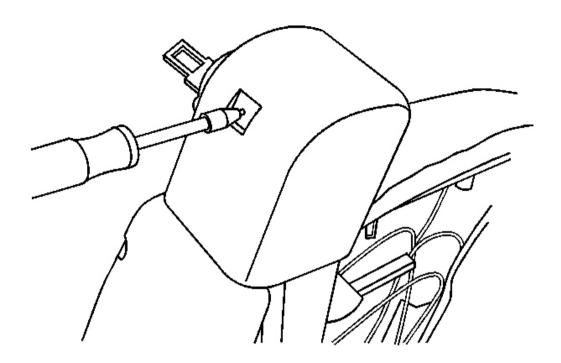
Retractor Tower Retaining Screw Courtesy of GENERAL MOTORS CORP.
